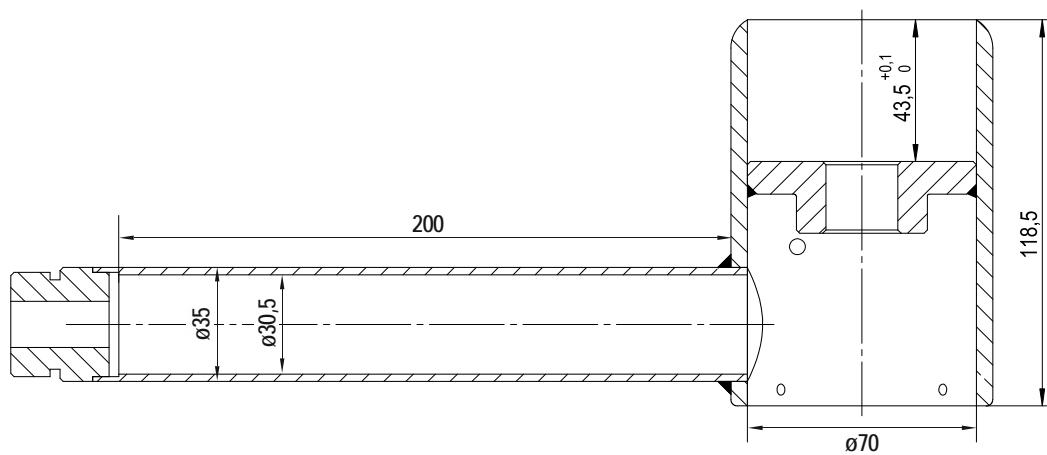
Dimensioned drawing rod sensor Type NOS-V40
